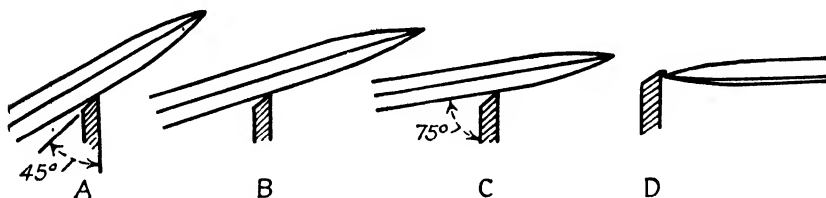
Steps in turning a burr on a beveled-edge scraper. If the burr is turned too much, it may be raised somewhat, as at D.
